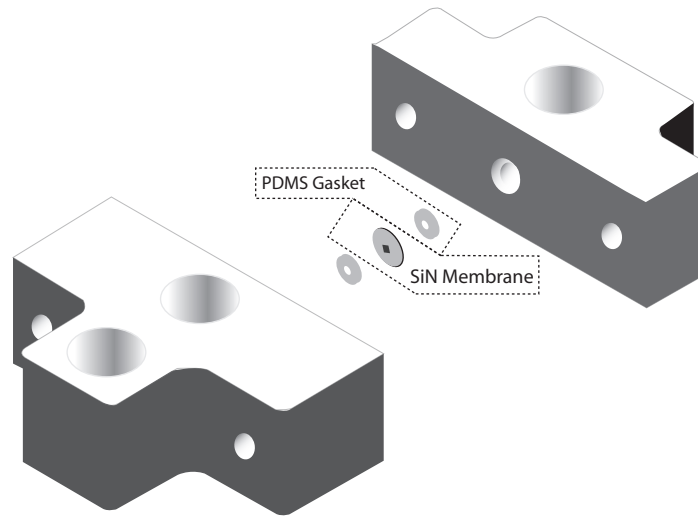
Holder #2 is made of teflon and comes in two parts. There are two holes on the sides of each piece to allow two bolts to thread through and clamp the two pieces together. In doing this, the PDMS gaskets sandwich the SiN membrane. The wells have very small holes to the membrane allowing for a low volume of buffer in each well.
